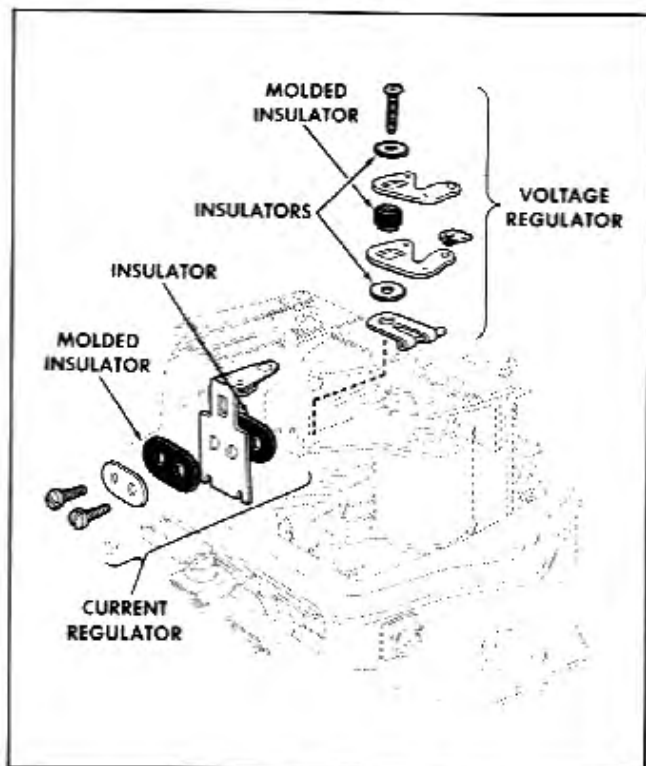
Regulator Contact Mounting—Dual Contact Heavy Duty Voltage Regulator
